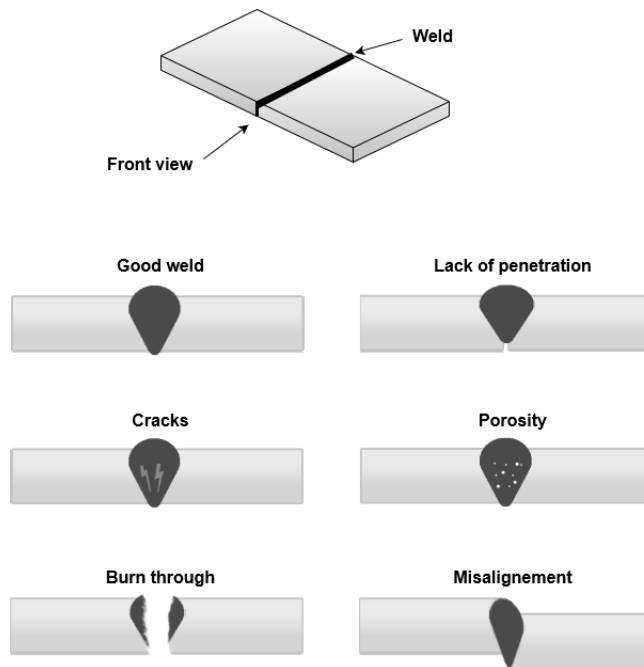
Some examples of welding defects illustrated from the front view of welded pieces.
